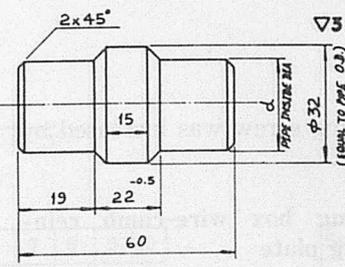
Transplanting Mechanism Mounting Frame Extension Piece (Quantity. Req 2, Material M.S.)
